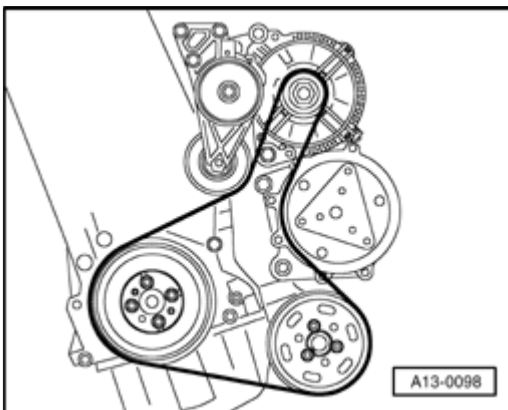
Identifying Belt Drive With Air Conditioning Compressor
